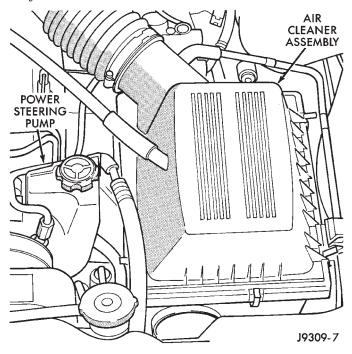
Air Cleaner Assembly & Power Steering Pump
